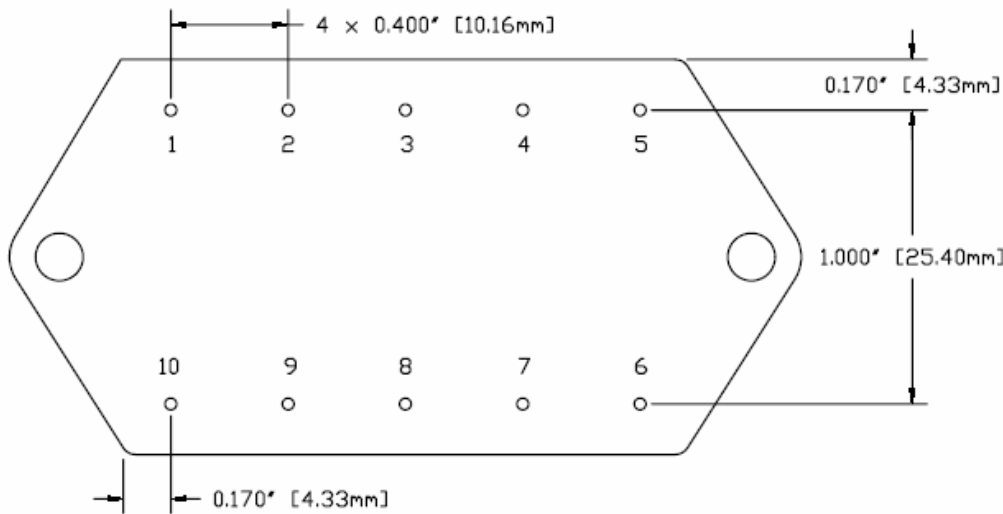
Flanged, Solder Seal Tin Plated Package and Pinout (Not Used for /HB or Higher Screened Products)
